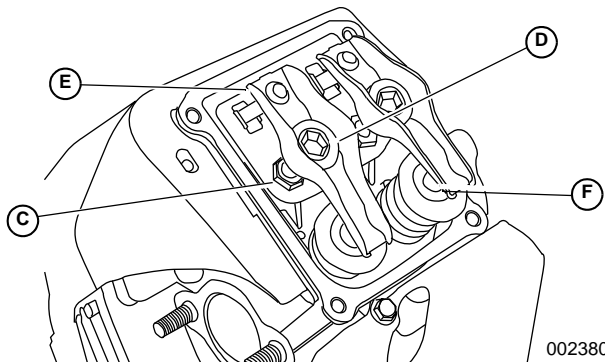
Valve Clearance Adjustment (8 kW, 11-22 kW - 530cc through 999cc)
